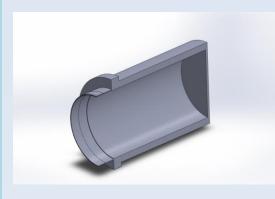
Polyethylene Enclosure designed using SolidWorks TM .
